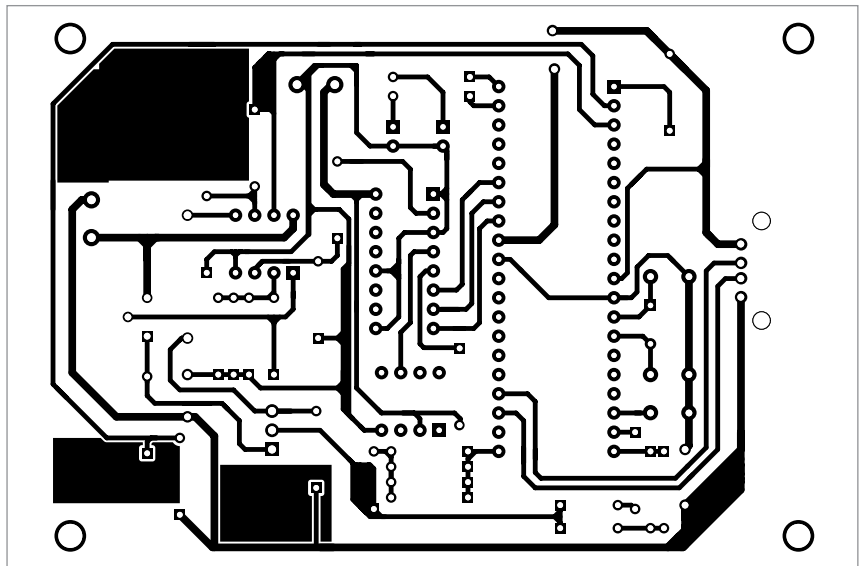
Actual-size PCB layout of the USB interface using Python software
